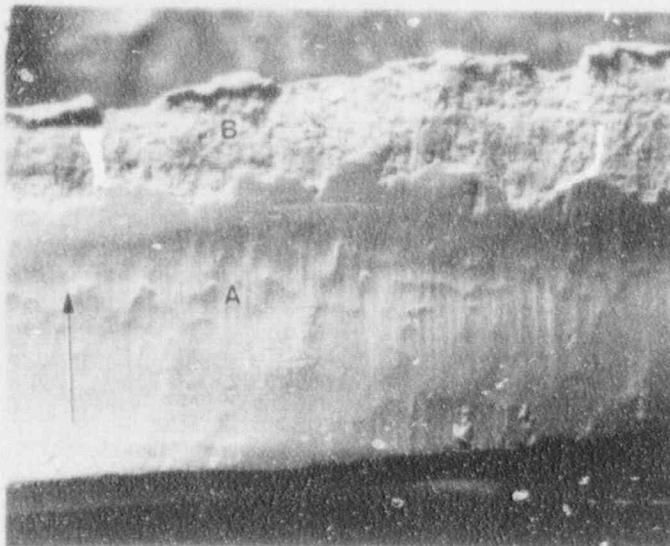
Back scattered electron fractograph of the stripped threads found entrapped on the threads of the outboard bolt of bearing block number 3, illustrating the presence of rubbed zone (A) in a direction of the arrow and a relatively undamaged sheared zone (B), at 80 X magnification.
